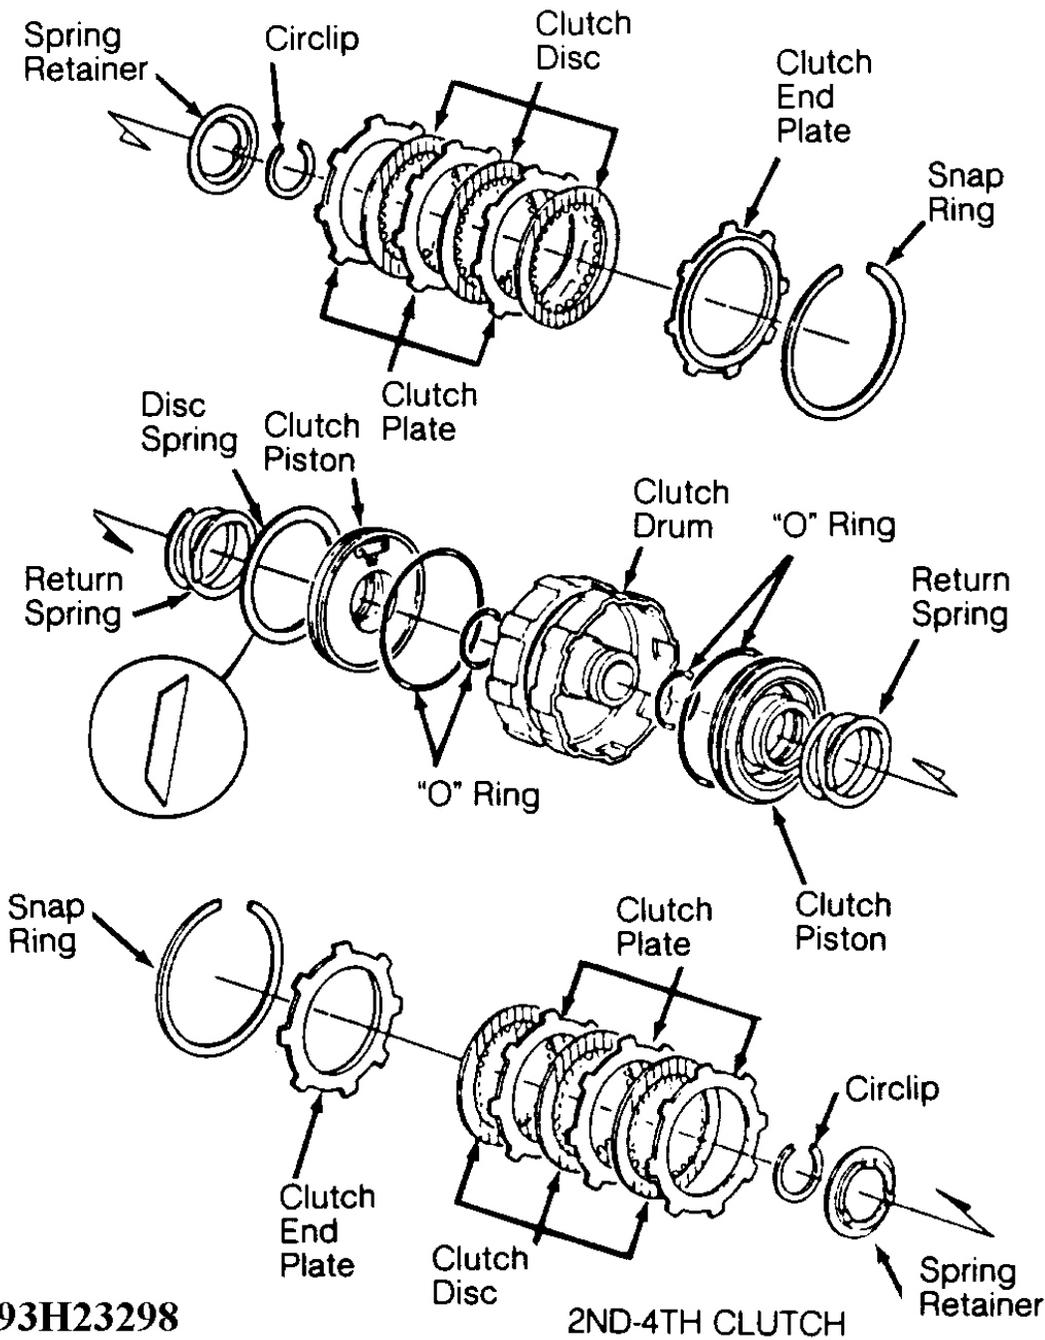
Exploded View Of Clutch Assemblies (3 of 3)
